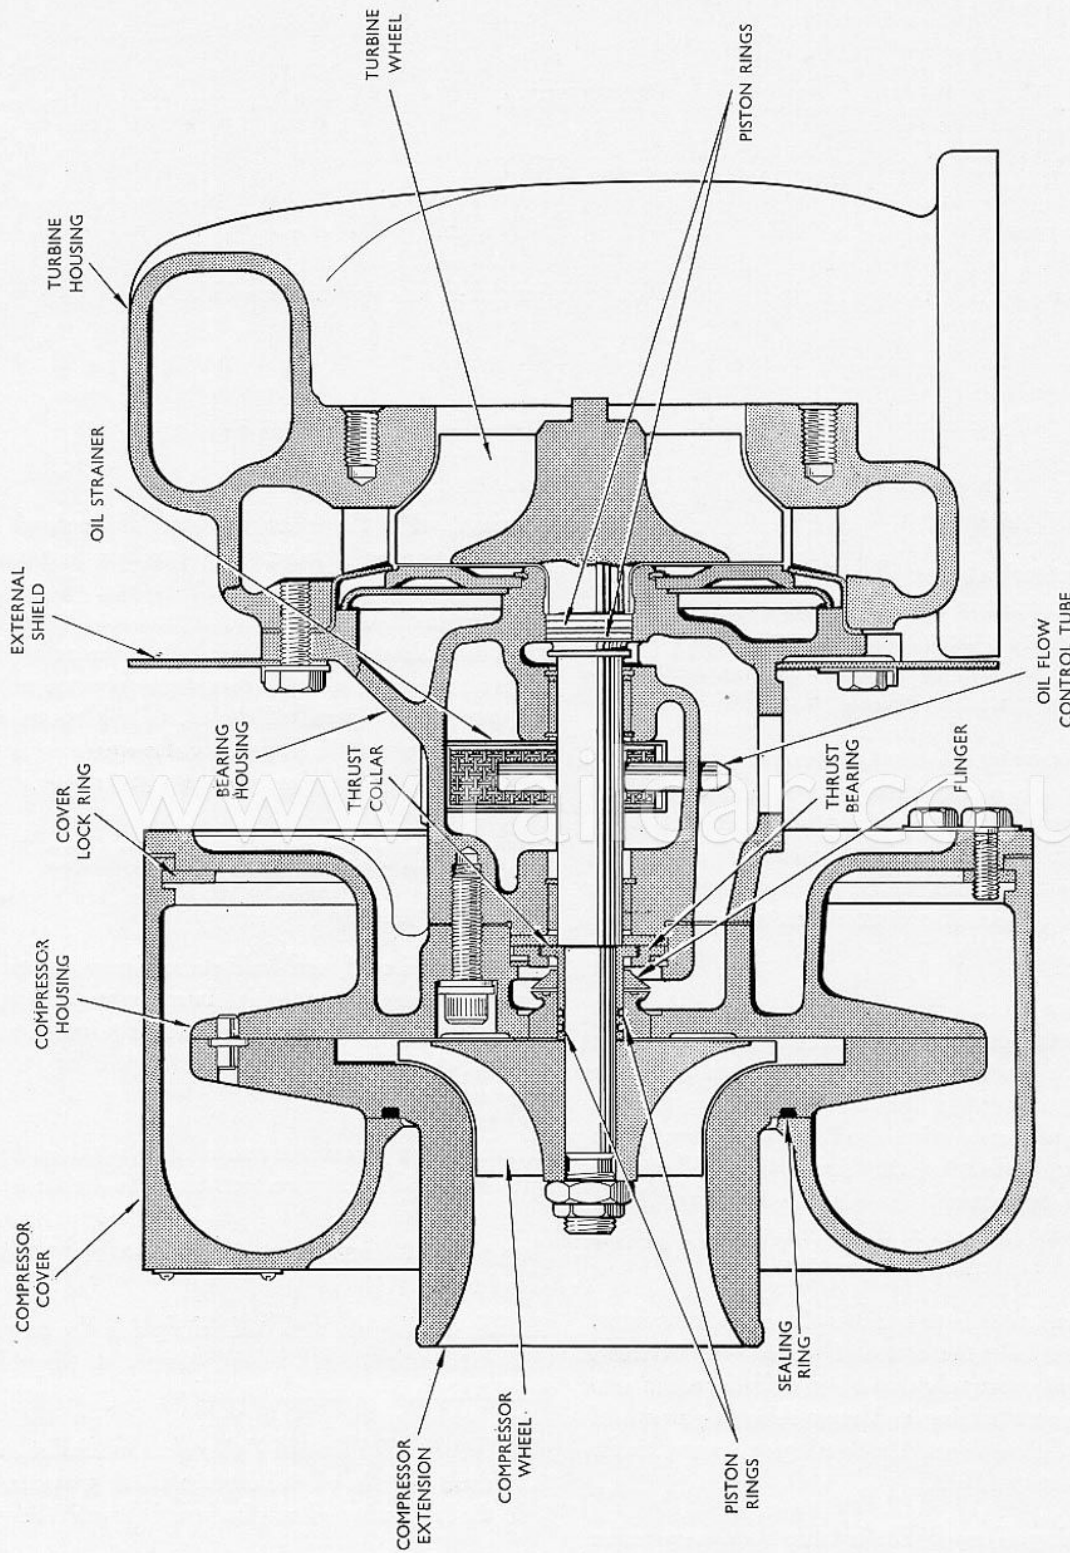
SECTION THROUGH HOLSET TURBOCHARGER
